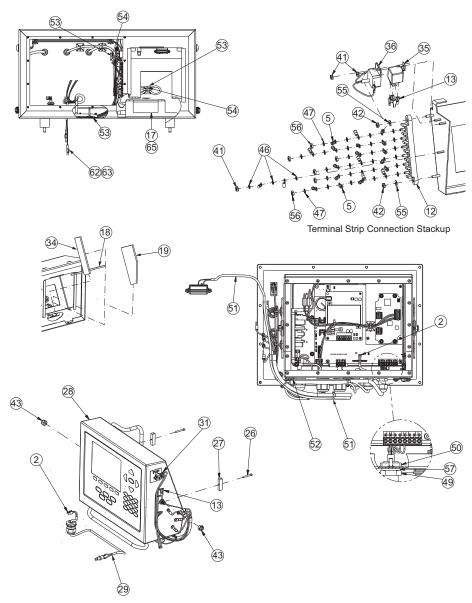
Indicator and Printer Assembly Parts Illustration
